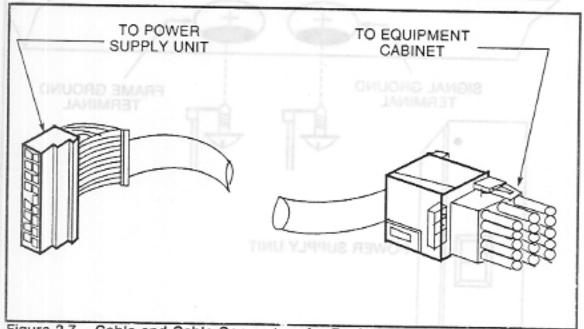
Cable and Cable Connectors for Equipment Cabinet Power Supply
